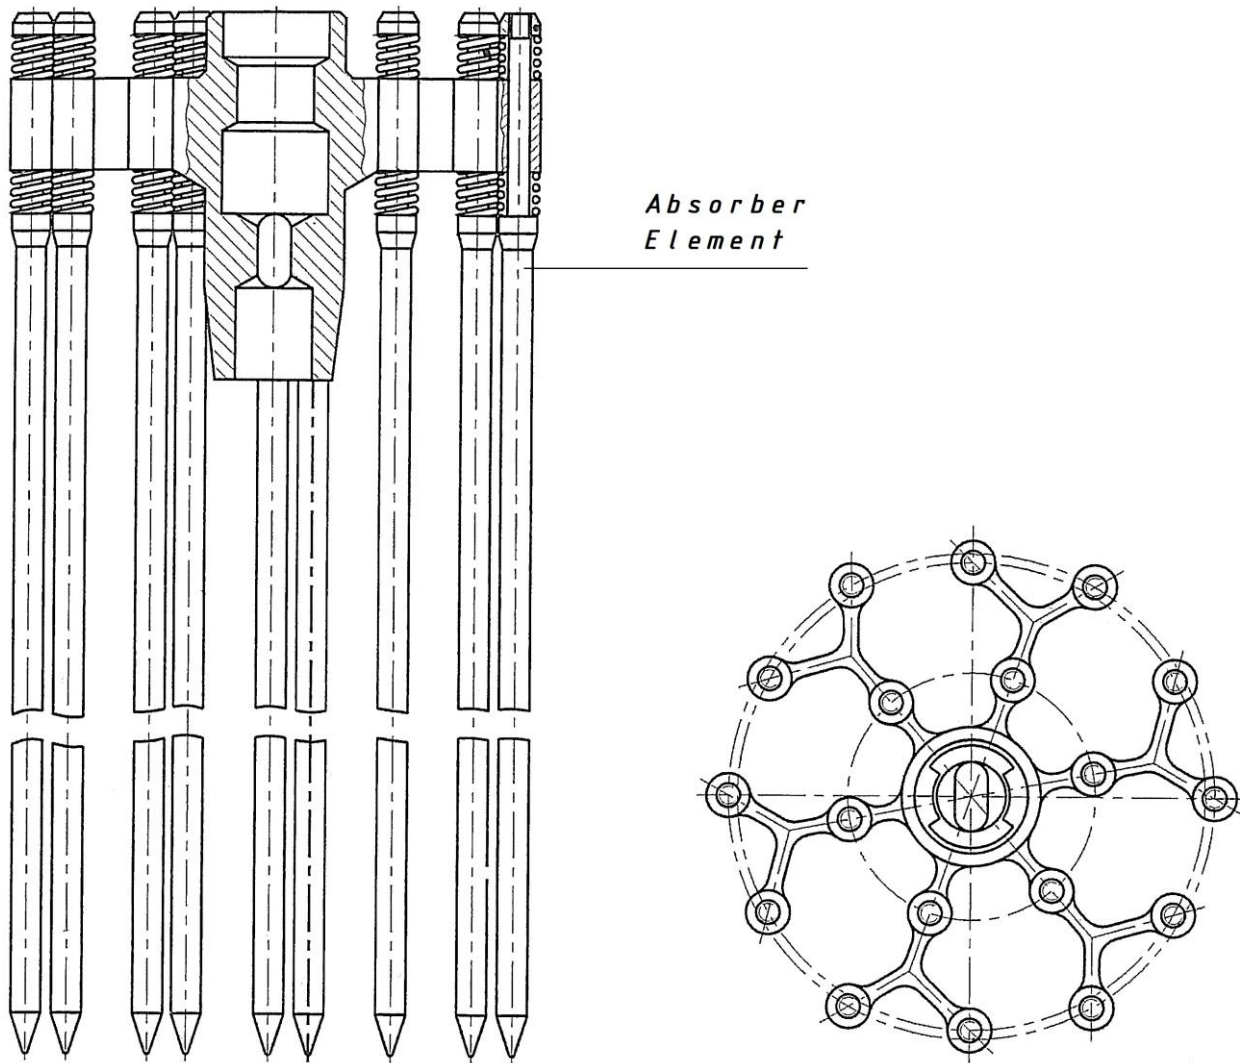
Scheme of the cluster of absorber elements with spring retainer (vertical view with a partial cut through spring retainer — left; view from above — right).
